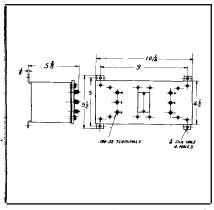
Outline Dimensions and Drilling Plan for Phase Shifting Transformer used with 3-phase, 4-wire Varmeter.
